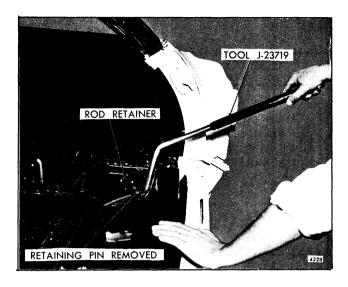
Torque Rod Tool - Torque Rod Release or Adjustment
